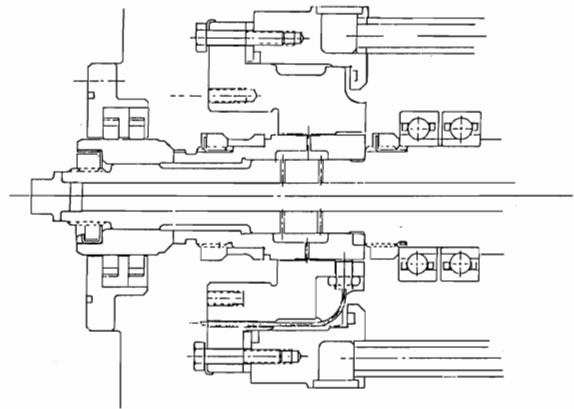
Cross section of internally fed bearing. Freon flows right to left through hollow shaft, and outward into rotating manifold.
